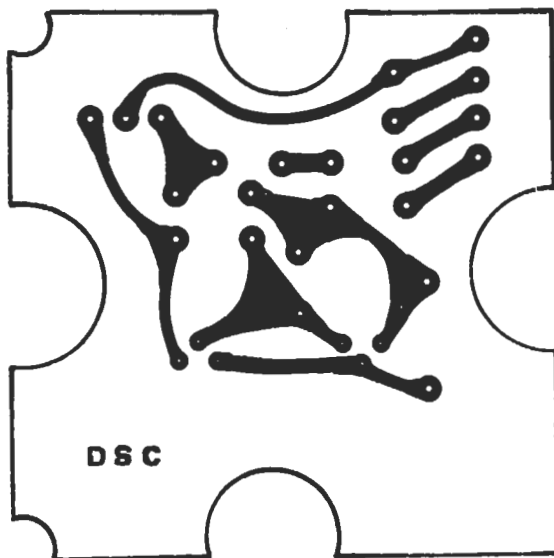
PCB pattern for the HE Drill Speed Controller.
